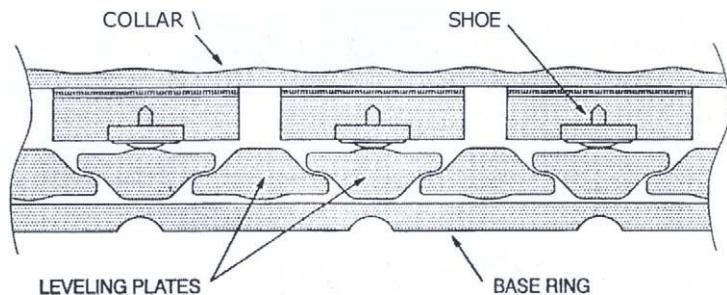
Self-equalizing tilt-pad thrust bearing (View – looking down on assembly) (Courtesy of Kingsbury, Inc.)
